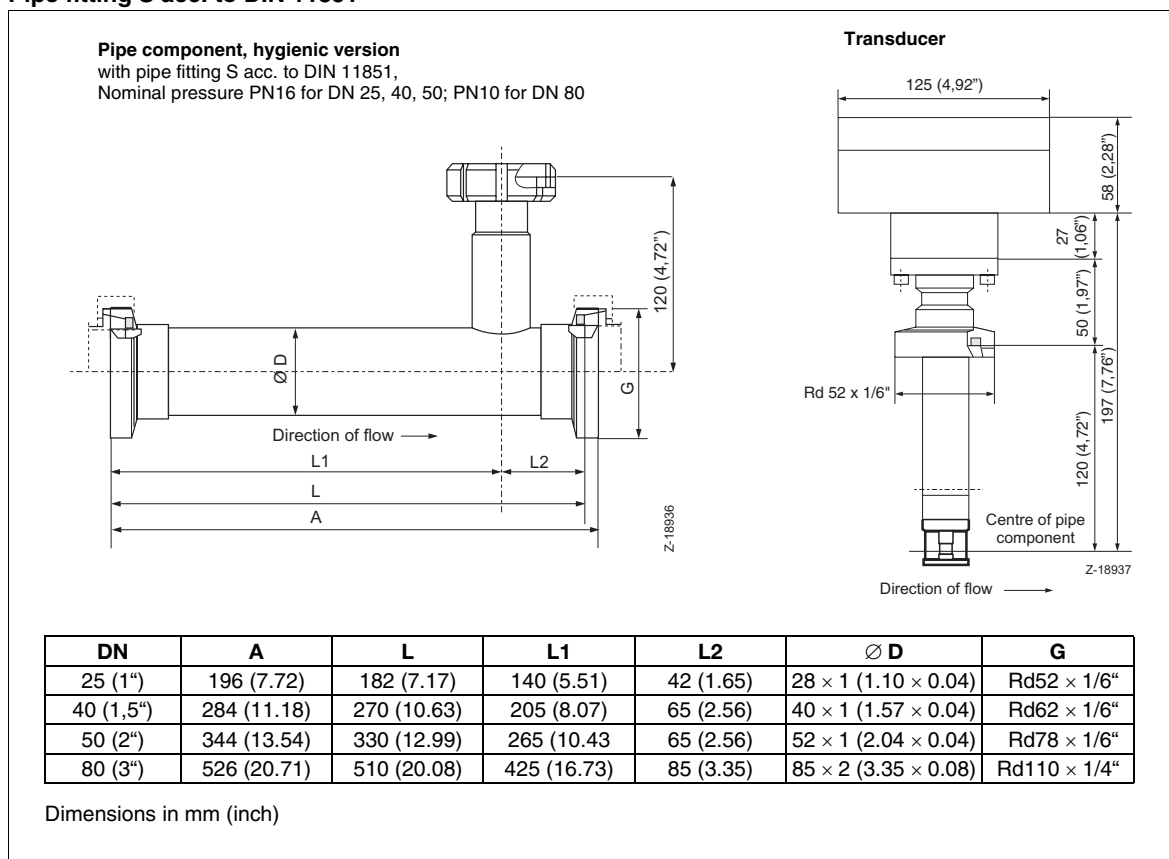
Dimensional drawings hygienic version with pipe fitting S
